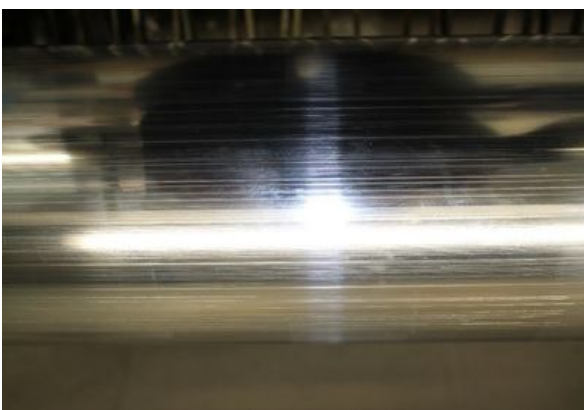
Piston rod of hydraulic cylinder with deep scratches
